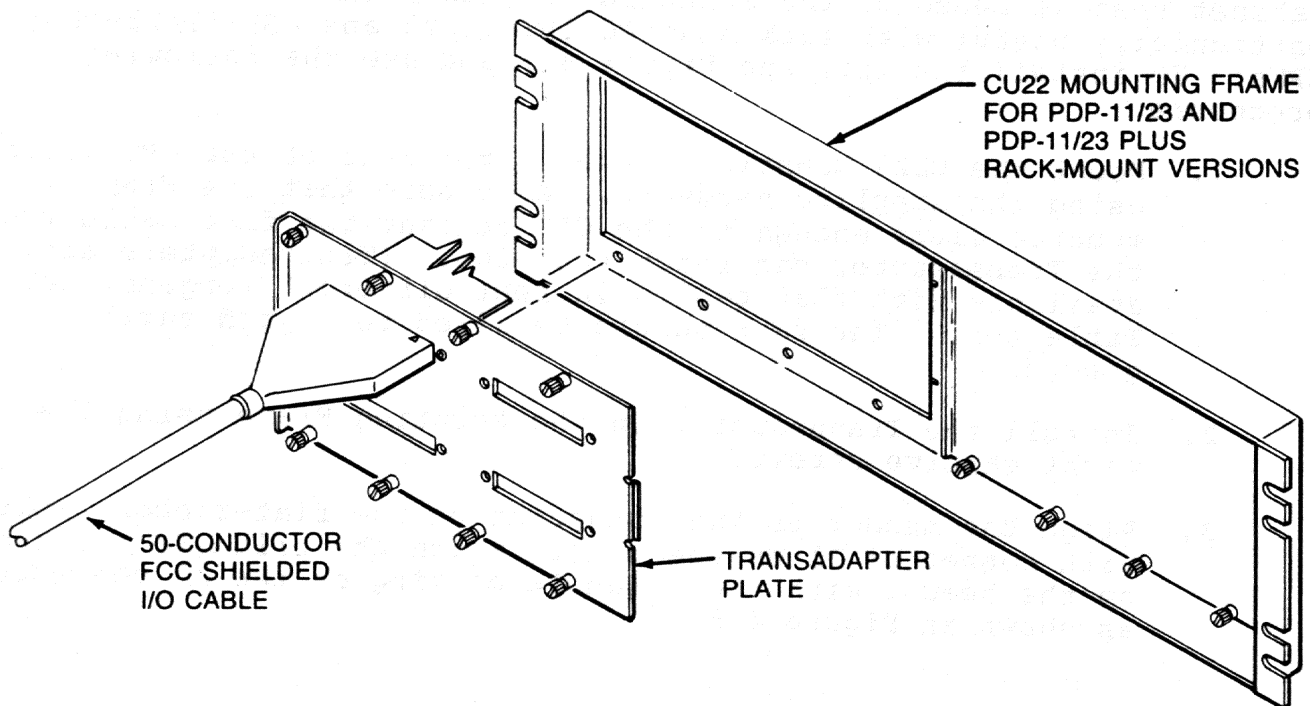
Installing the Universal Rack Mount Cabling Kit
